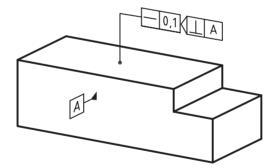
Specification using an intersection plane perpendicular to the datum
